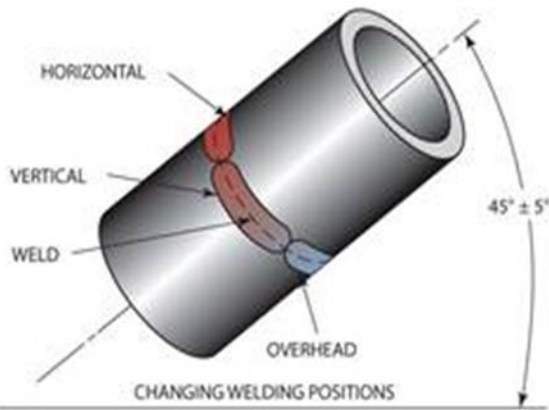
In the 6G position, the pipe is fixed at a 45° angle to the work surface. The effective welding angle changes as the weld progresses around the pipe.
